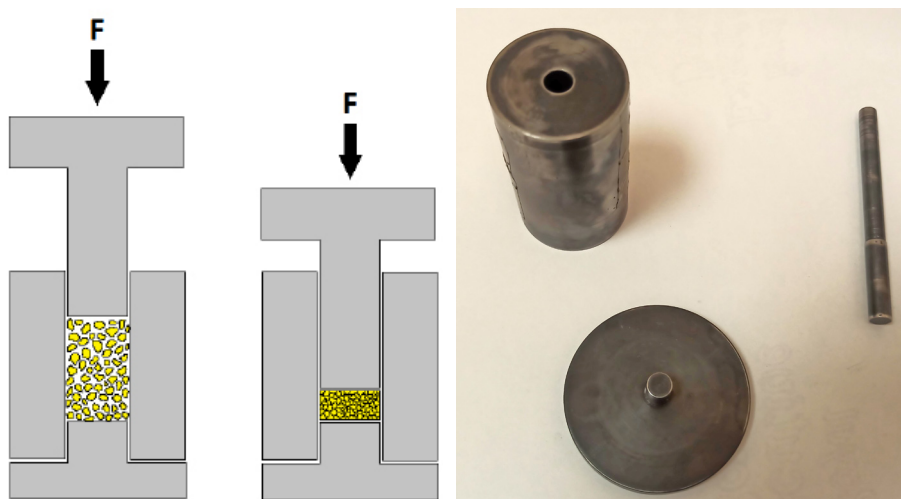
Experimental setup for the pressing of RDX/wax in the mould
